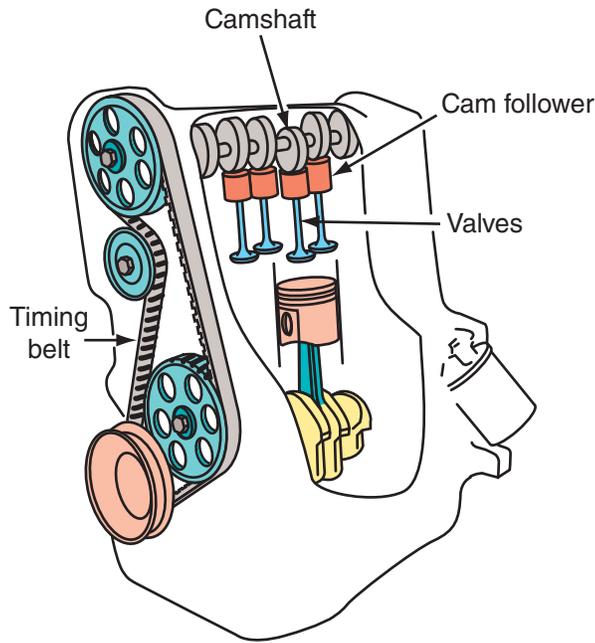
The opening of the valves is controlled by the camshaft.
